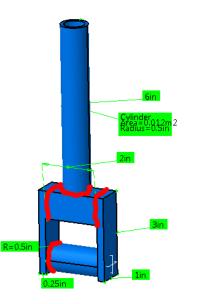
Angular adjustment. The red squiggly lines represent the spots to weld.
